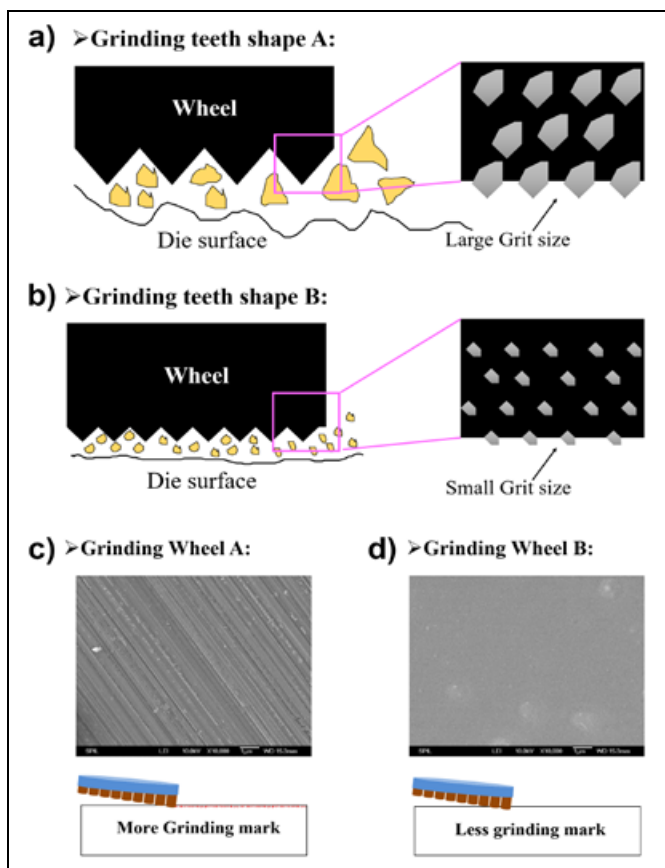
a) Grinding teeth shape A; b) Grinding teeth shape B; c) Grinding wheel A; and d) Grinding wheel B.
